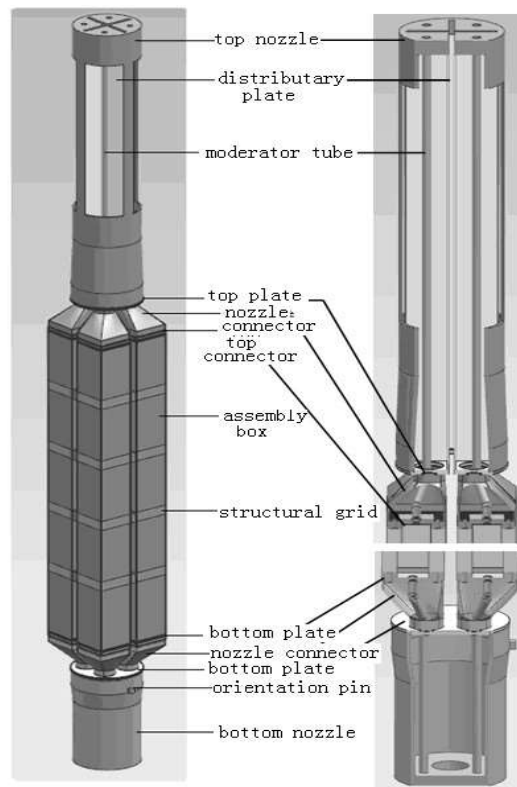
Fuel assembly cluster of the Chinese SCWR concept.
